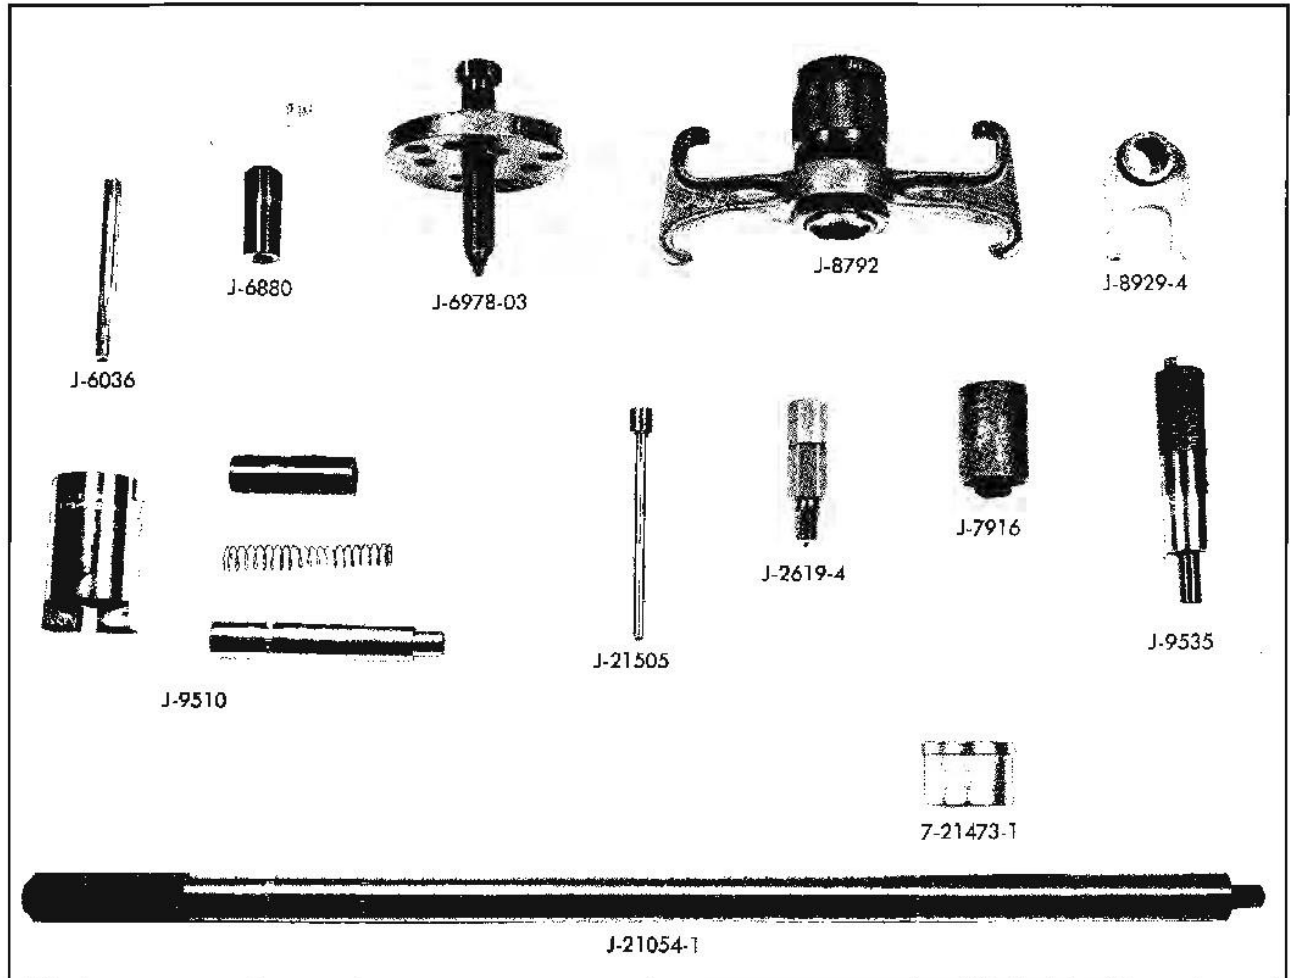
Special Engine Tools (6 Cylinder Engine)
